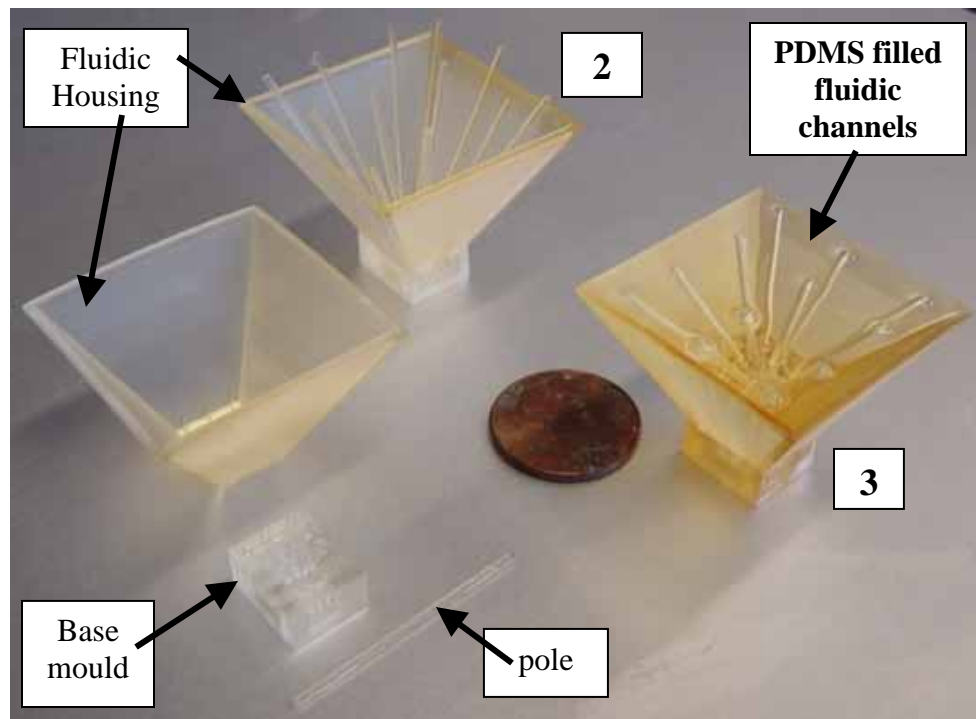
The assembly of the fluidic housing, base mould, and poles to make “PDMS filled fluidic channels”; Where: 1 = before the assembly, 2 = after the assembly, and 3 = after pouring the PDMS into the fluidic housing and it solidify
